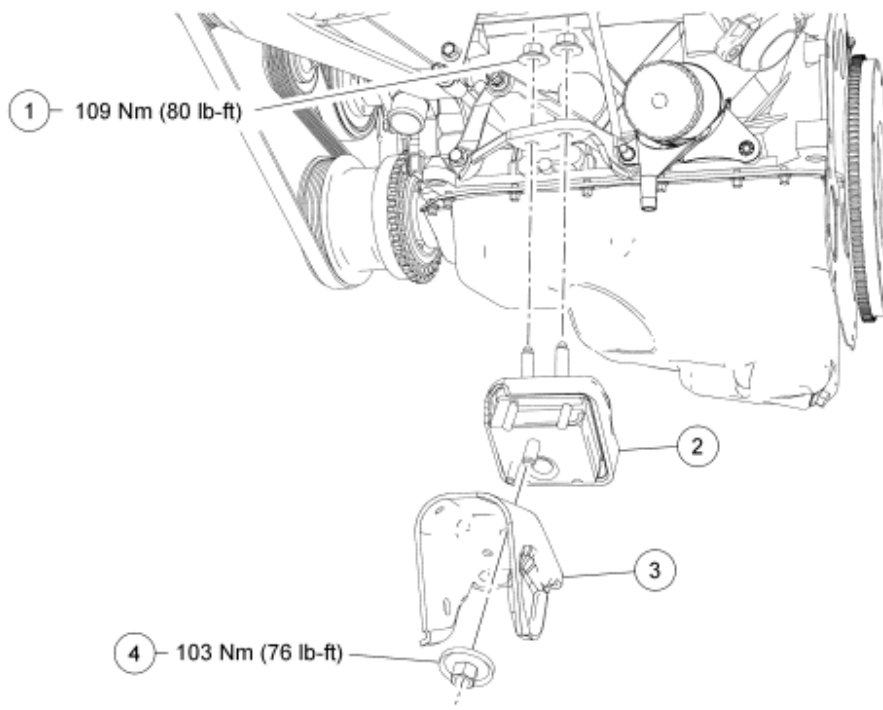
View Of Engine Support Insulators - LH With Torque Specifications
